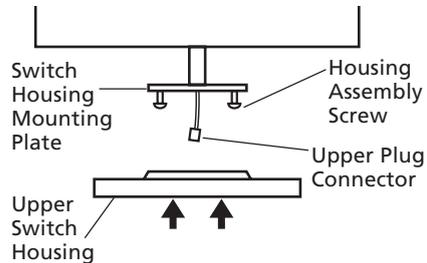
Attaching Upper Switch Housing to Switch Housing Mounting Plate
